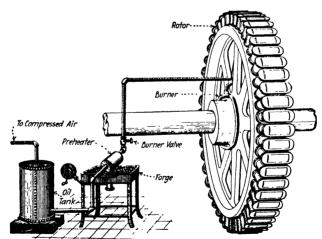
Arrangement of oil pipe and burner for the heating of the rotor of Fig. 190.
